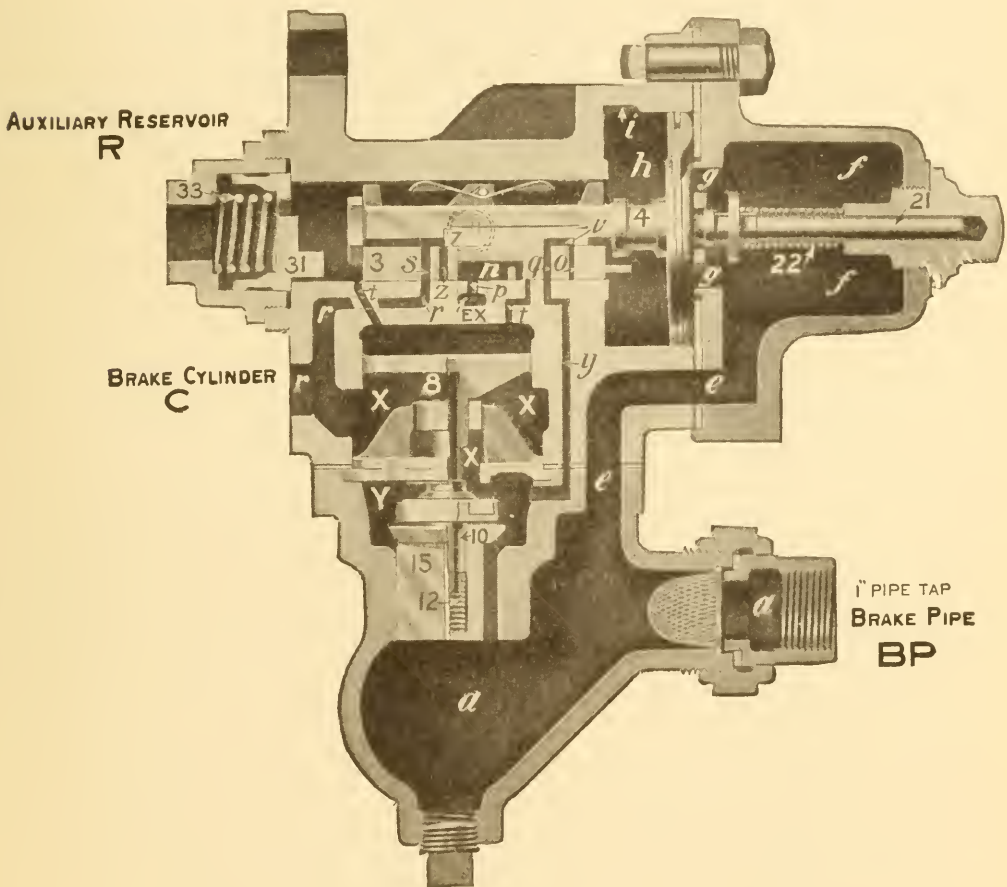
Type "K" Triple Valve Shown in Emergency Position
